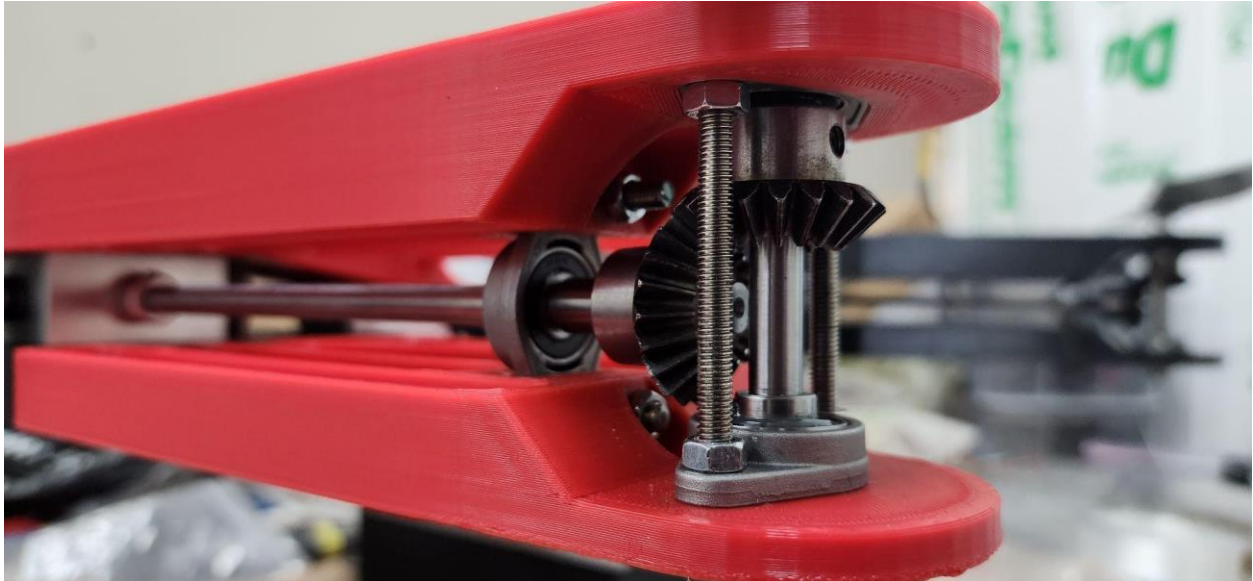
Closeup of how the 3d printed wing piece is supported by threaded rods
